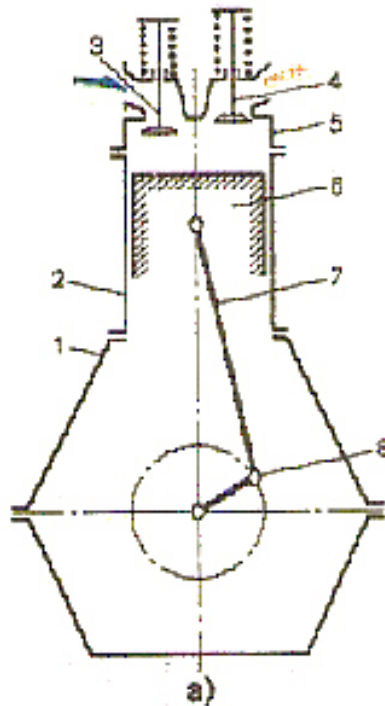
Schematic diagram of a piston internal combustion engine
